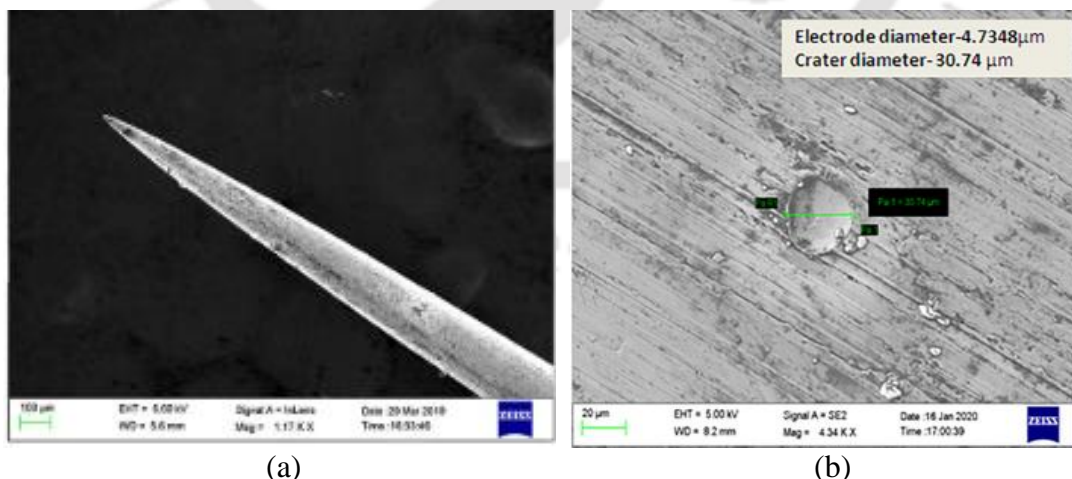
(a) Fabricated microtool and (b) crater on Ti-6-Al-4V workpiece [39]
